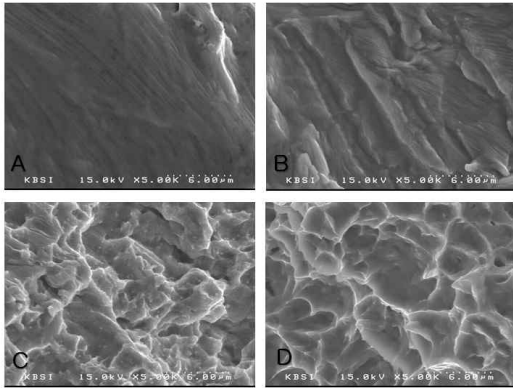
SEM fractographs of failure during endurance limit test (original magnification  $\times 5,000$ ). A, Fractograph of fixture showing fatigue striations in group CJT. B, Fractograph of abutment screw showing secondary crack intersecting the primary plane of fracture in group BJS. C, Fractograph of fixture showing fine equi-axis dimple pattern in group CJO. D, Fractograph of abutment screw showing fine equi-axis dimple pattern in group BJT.
